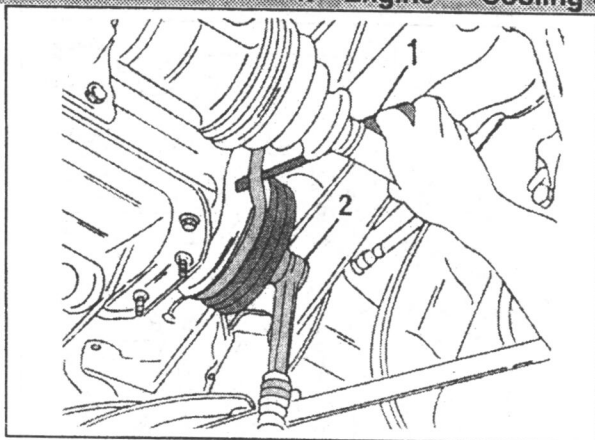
Insert a screwdriver (1) as shown and rotate the crankshaft with a socket (2) until the water pump drive belt is free.
